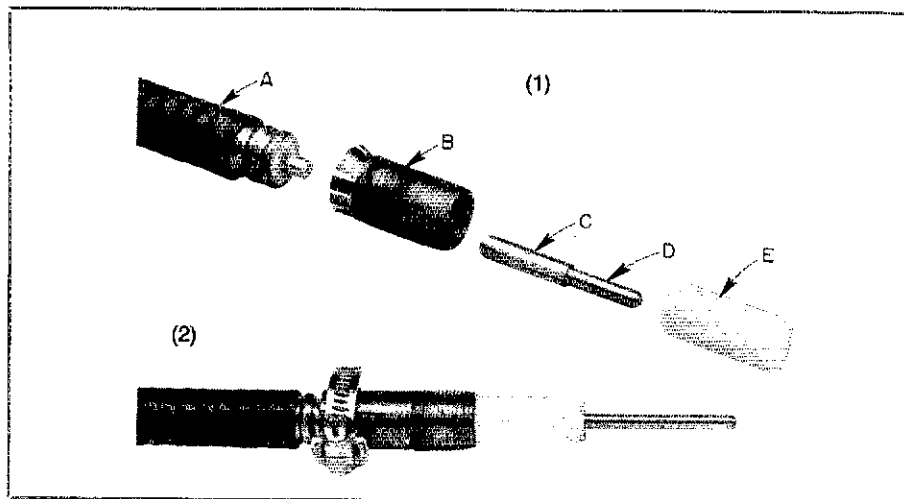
A constant-impedance female UHF connector for Heliac LDF 4-50 cable is shown in disassembled (1) and assembled (2) form. Part A is the coaxial cable. Part B is the outer shell made of type K copper water pipe. The female center conductor (C) is composed of two parts: a 7/32 OD × 5/16-inch-long piece of hobby brass tubing and the center portion of an SO-239 connector soldered together. The small diameter rear portion of the salvaged SO-239 pin is removed. In the photo, a center pin, part D (as from a PL-259 connector), is seen inserted into the female portion of the connector; the Teflon section (part E) is used to maintain concentricity of the female pin. (The only purpose of the male pin is to expand the female pin so that it is held in alignment by the plug.) One way of attaching the connector to the coaxial cable is shown at (2), where a compression clamp is used. Again, the Teflon section and large male pin are used only as an alignment finger and are not part of the finished connector. In lieu of the compression clamp, the fingers on the outer shell of the connector may be soldered to the metal outer conductor of the cable.
